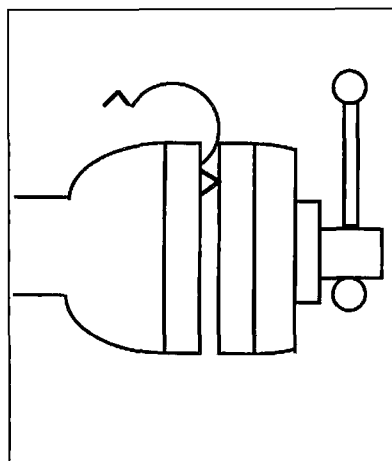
Using a vise to flatten the edges of a flagpole bracket to make the end half-ring a little larger so that the spring will fit in.
